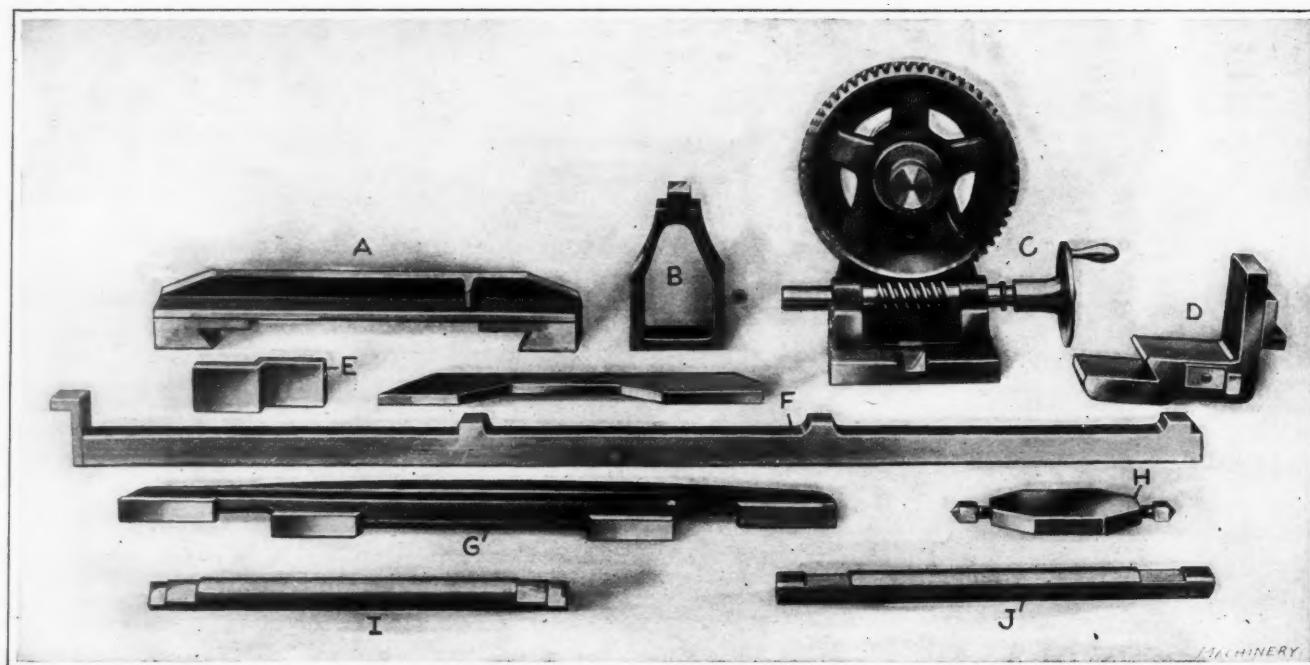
A, Width Gage for Ways of Bed; B, Gage for Lead Cams; C, Cam-shaft Worm and Gear Testing Fixture; D, Gage for locating Index Bracket Faces from Ways; E, Locating Gage for Ways of Chuck Operating Slide; F, Gage for Gear-box, Table and Ways; G, Gage used with Boring Fixture; H, Center Gage used in planing Beds; I, Gage for Cylinder Carriage Cap Bearing; J, Gage for Cylinder Cap Bearing
